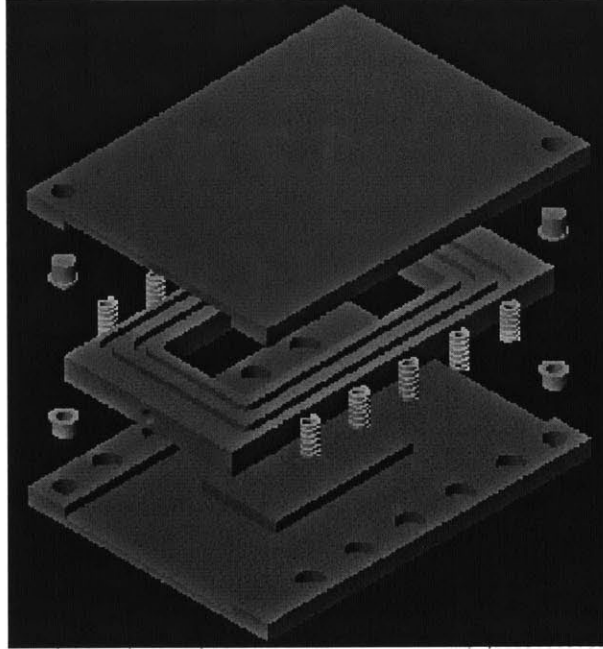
Mold with Internal Vacuum Chamber used for tmAFCs A-K
